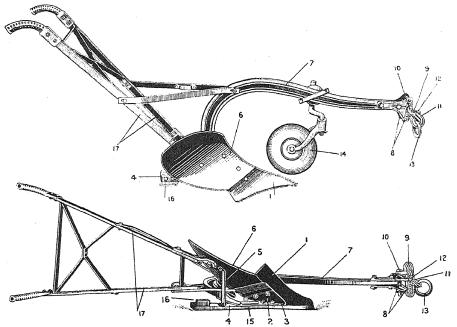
Single-furrow Mouldboard Plough, showing Parts.
